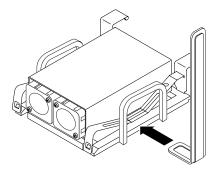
Inserting the Heat Sink Removal Tool
